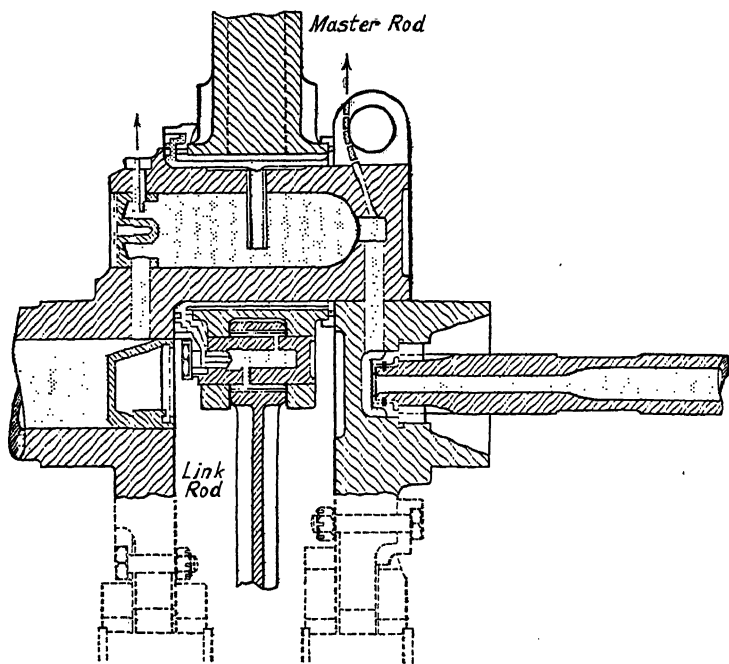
Wright "Cyclone" connecting rods and crank-pin, showing also lubrication system.
